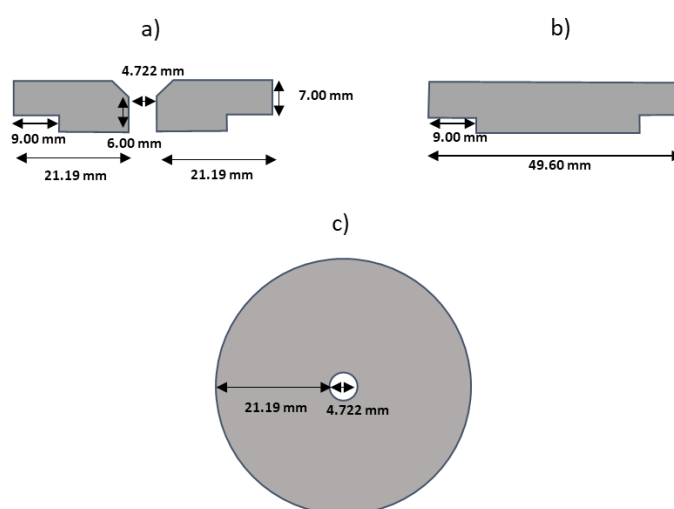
Scheme of the adhesion test scraper used during the mechanical test solliciting the coating/metal interface (a) longitudinal section view, b) front view, c) top view)
